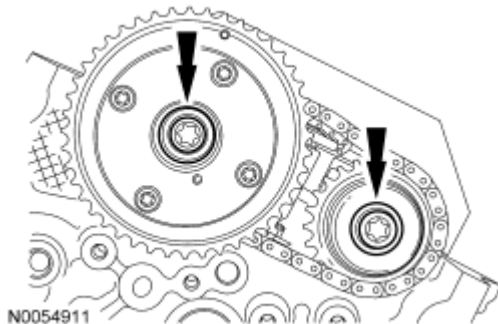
Locating LH VCT Assembly Bolt & LH Exhaust Camshaft Sprocket Bolt
